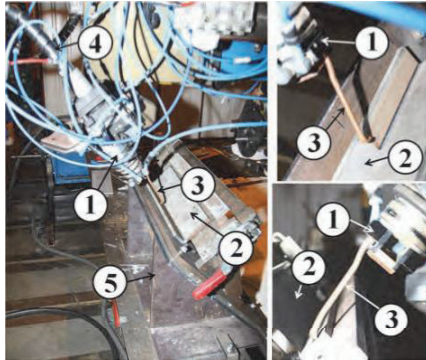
Experimental set-up of laser welding experiments. 1 = laser welding head, 2 = workpiece, 3 = compressed air nozzle, 4 = process fiber, 5 = fixing system.
